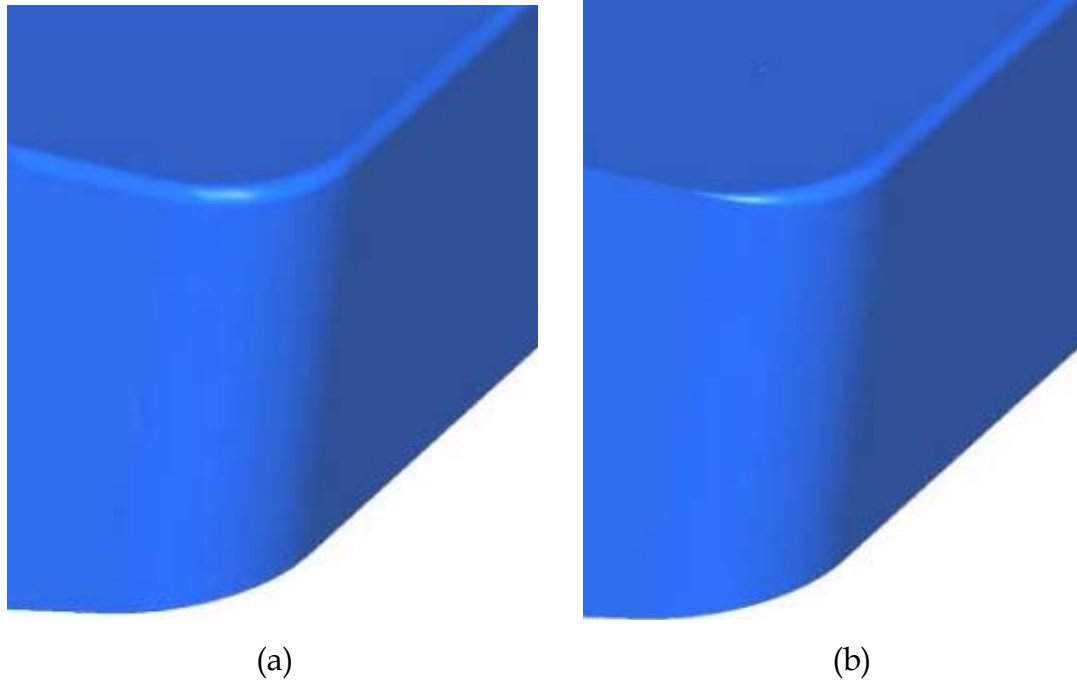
(a) Uniform edge honed tool and (b) variable edge honed tool.
